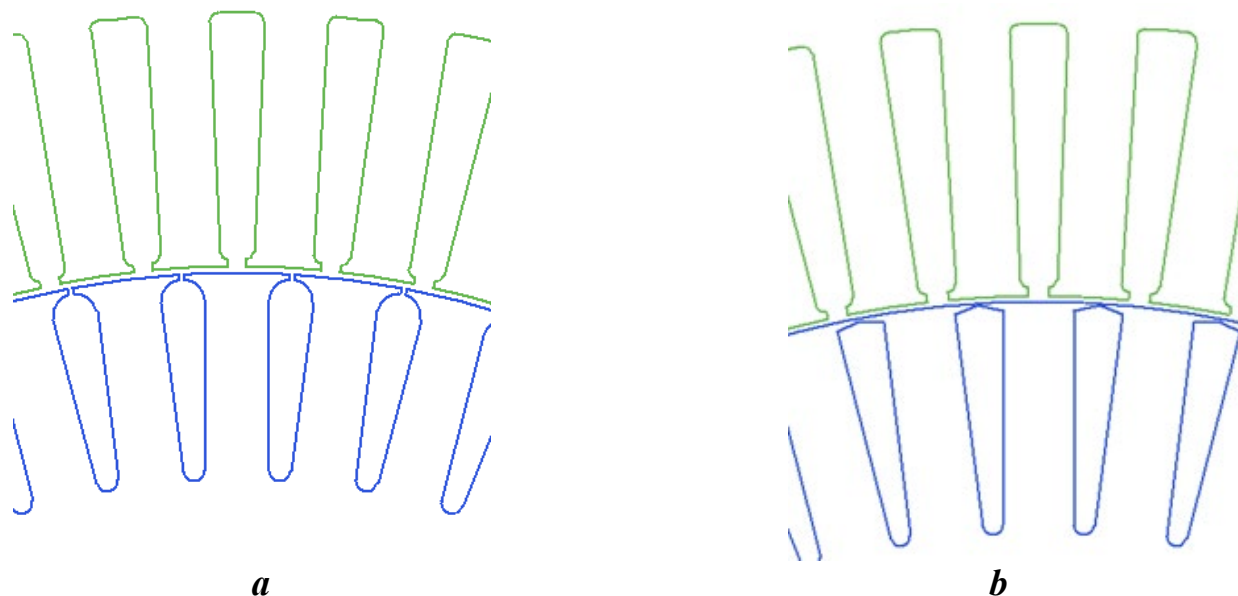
Toothed zone of the basic version (a) and Tooth zone of the modernized motor (b)
